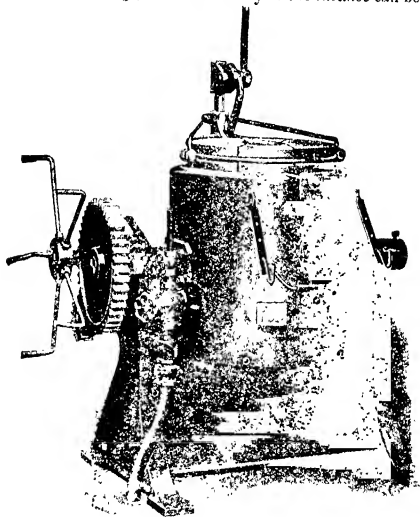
Alldays' Tilting Furnace for Oil or Gas.
